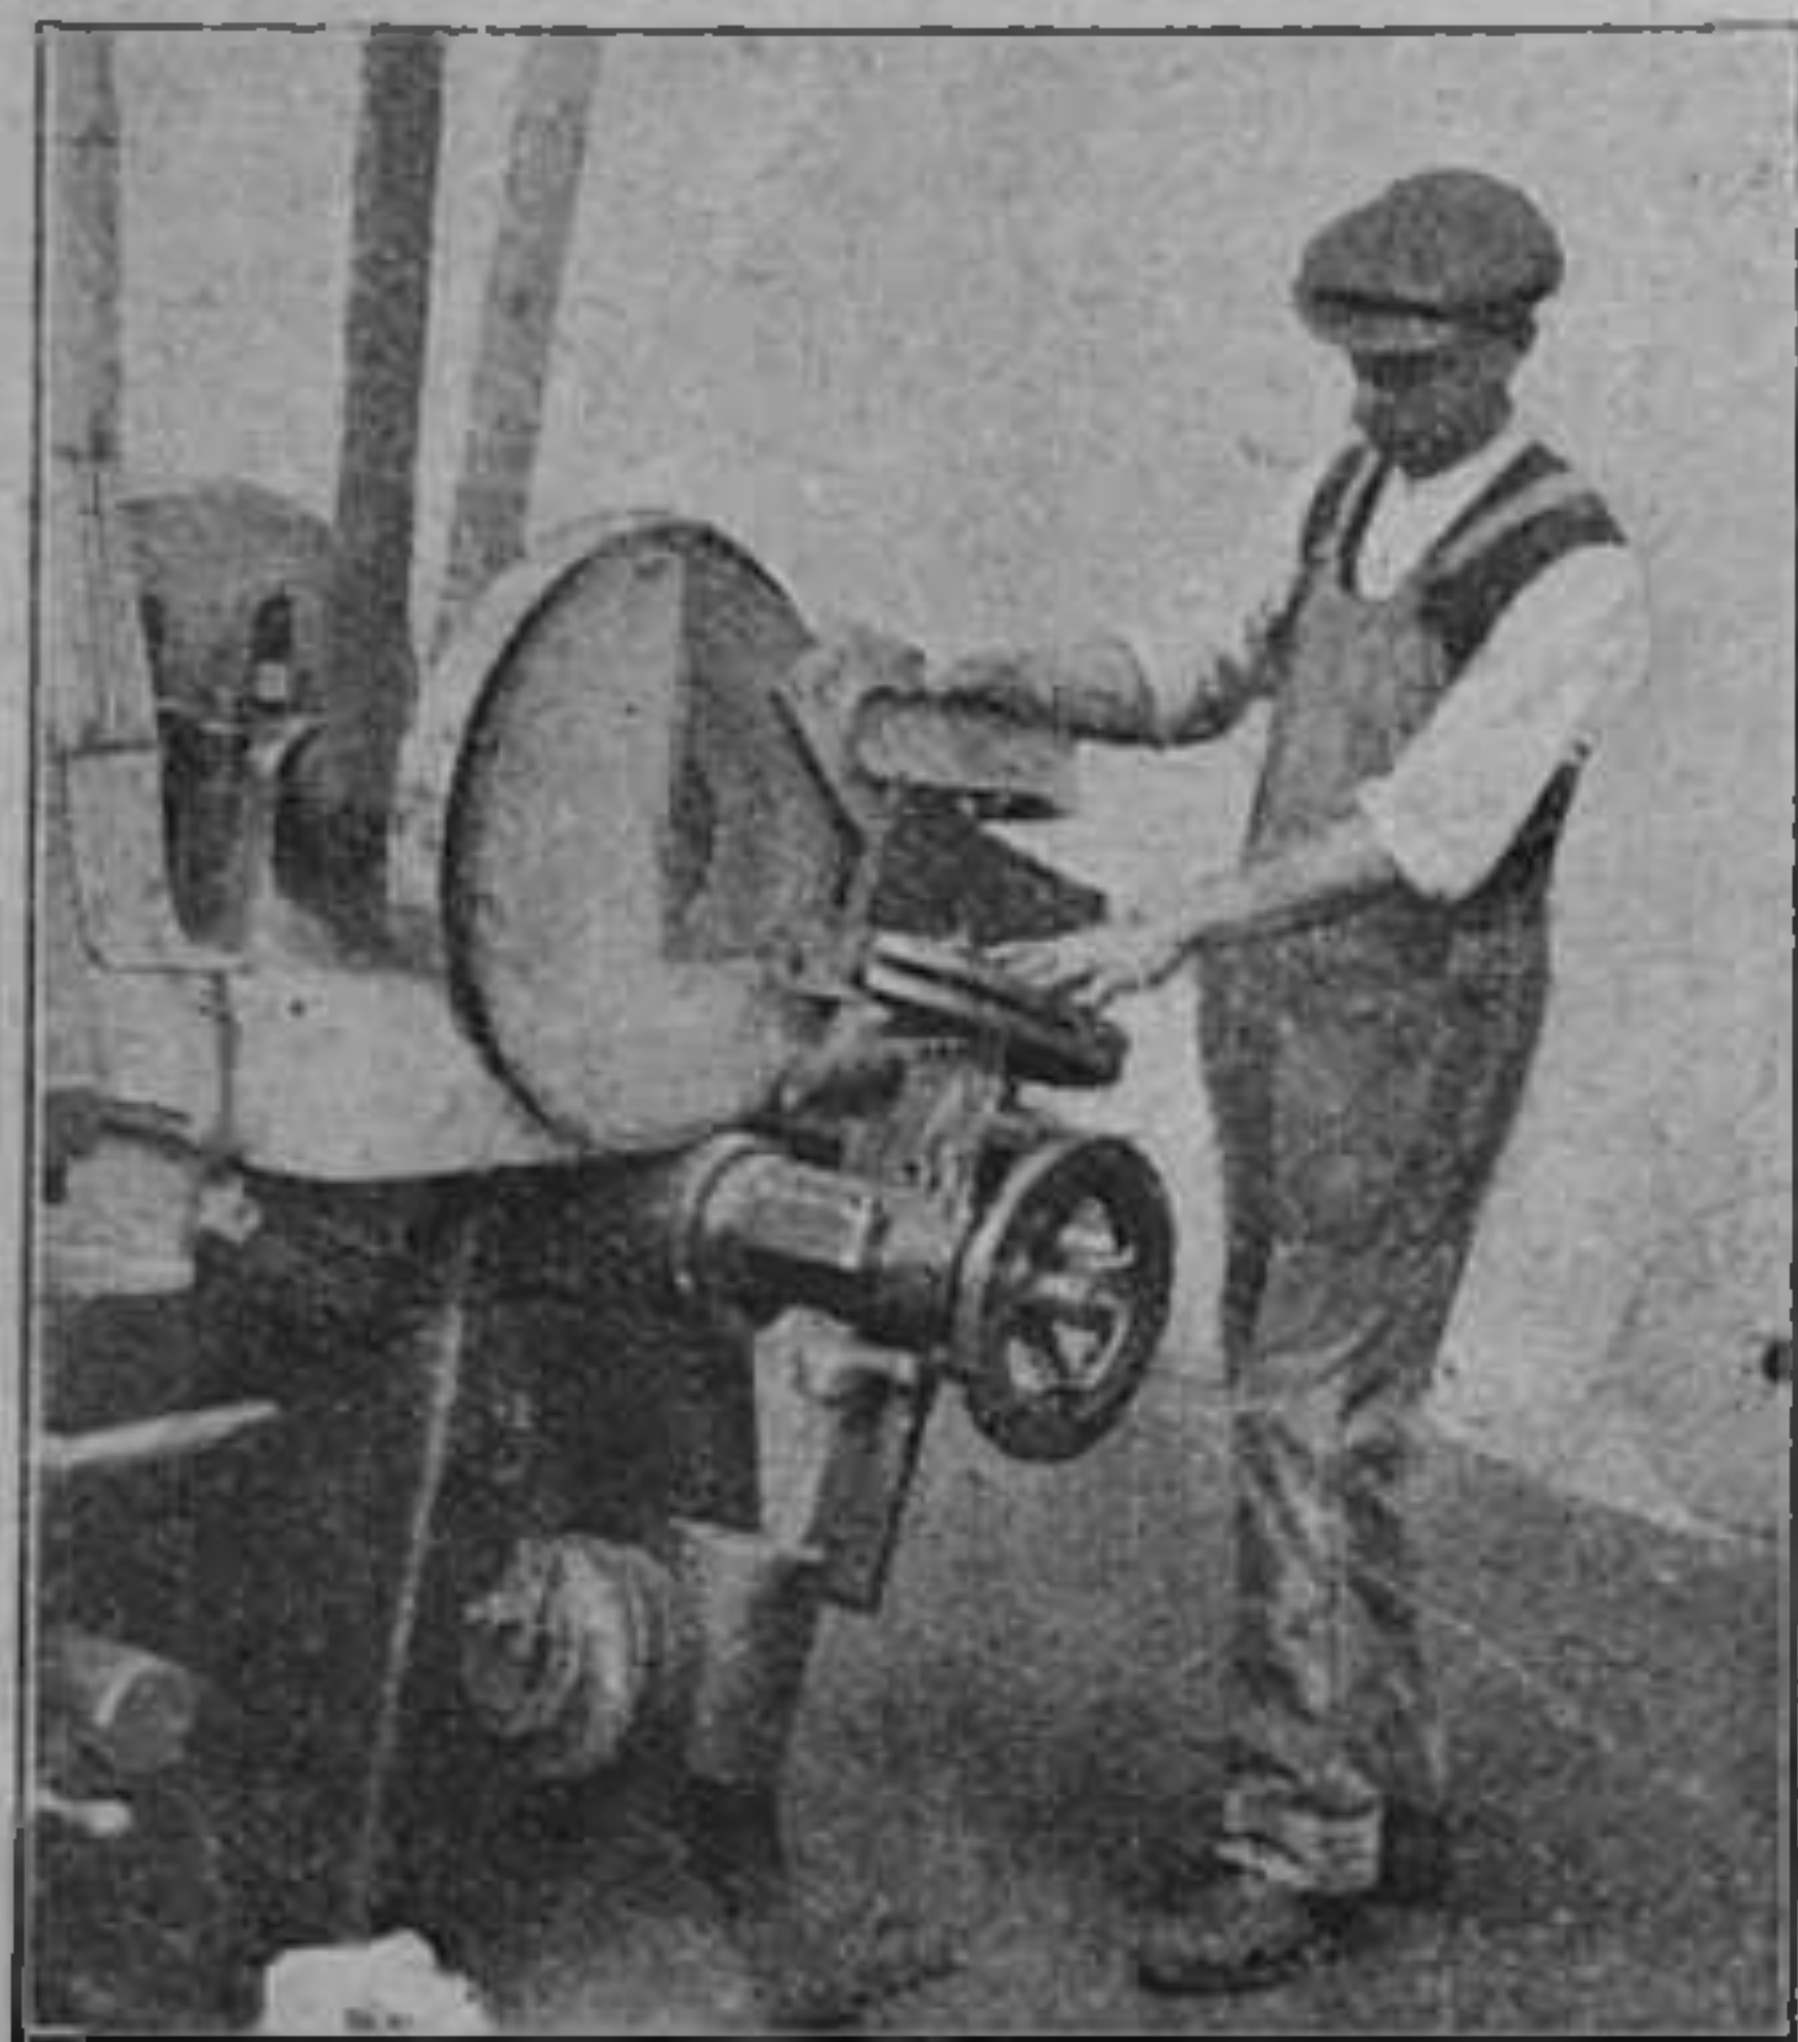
Grinding the joints dead flat. This part is held in a jig, which passes backward and forward in front of the revolving grinder. Both the timing chest and chain cover are thus treated.
